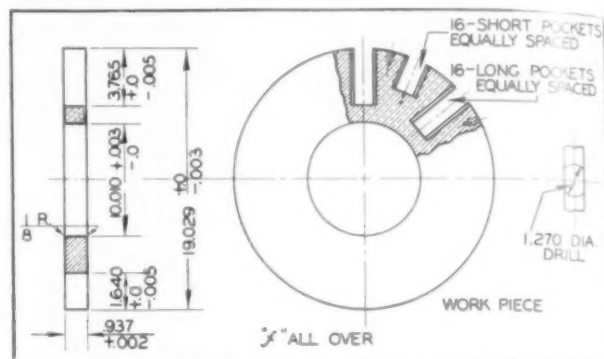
The part, with the major portion shown blank and a small portion in section to show the alternately deep and shallow holes.
